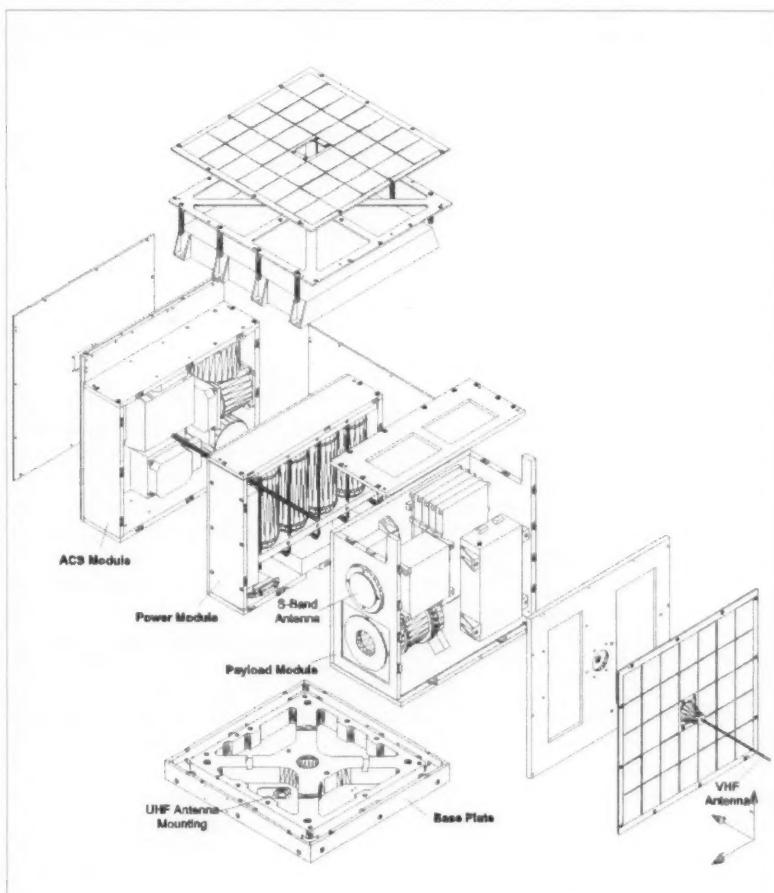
Exploded drawing view of MAROC-TUBSAT from the Technical University of Berlin (TUB).
